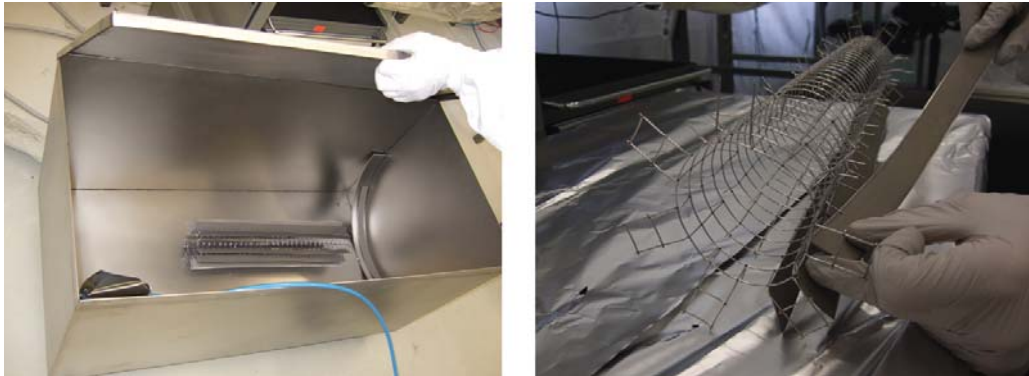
Manufacturing of a getter pump. St707 strips have to be cut under an argon protective layer. This is achieved by working the material inside a container which is continually flooded with argon. The strips are placed onto a wire-mesh which can be adjusted to the appropriate diameter.
